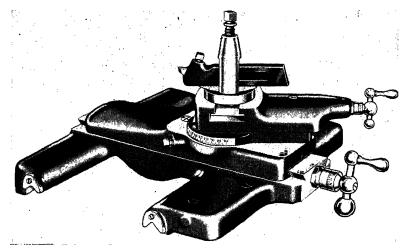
Single-point-cutting-tool support—adjustment in all planes—known as a compound rest. (South Bend Lathe Works.)
